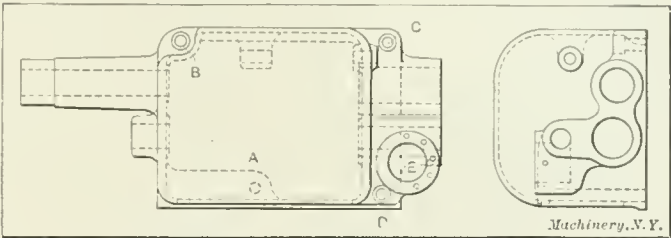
Feed Gear-box drilled and bored on the Jig in Fig. 11
